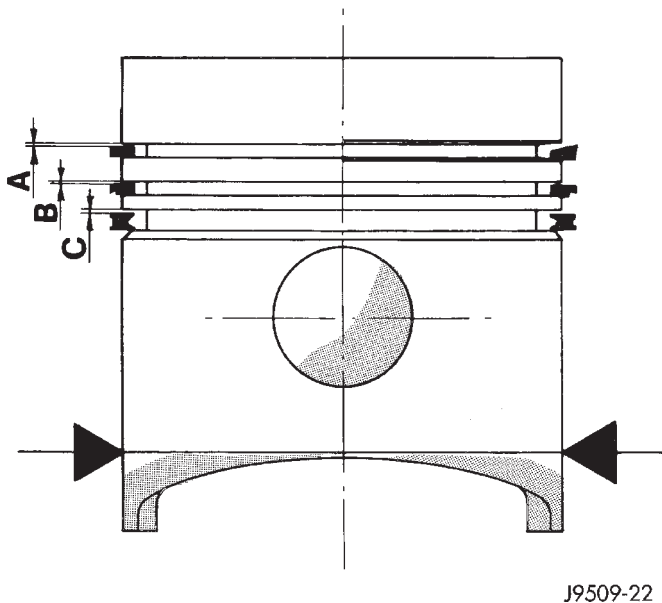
PISTON RING TO GROOVE CLEARANCE
